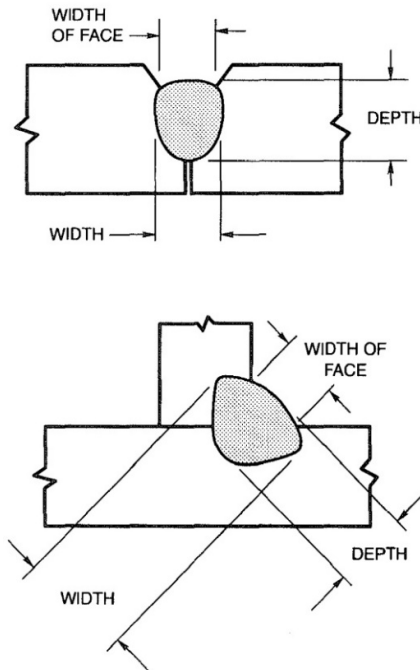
Weld Bead in which Depth and Width Exceed the Width of the Weld Face (see 3.7.2)
